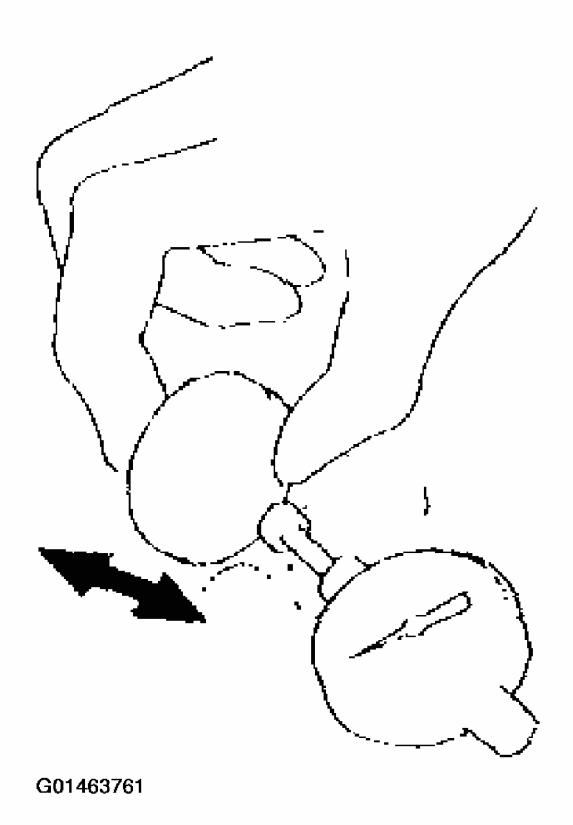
Measuring The Guide-To-Stem Clearance Courtesy of AMERICAN HONDA MOTOR CO., INC.
